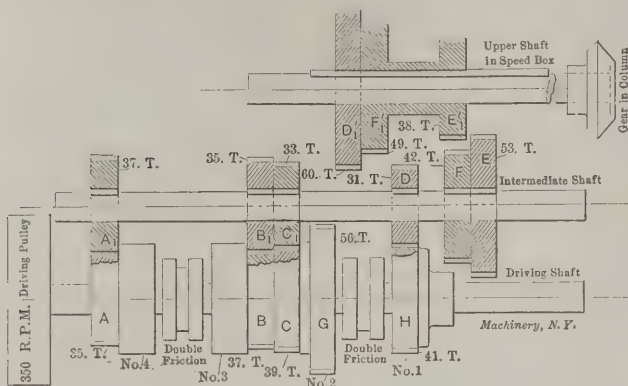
Arrangement of Clutches and Gearing in the Speed Changing Mechanism.
